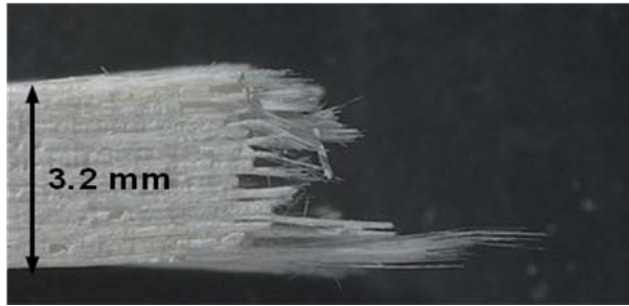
Fracture surface of the N720/AM specimen(2) tested in tension to failure with constant loading rate of 25MPa at 1100°C in steam (side view).
